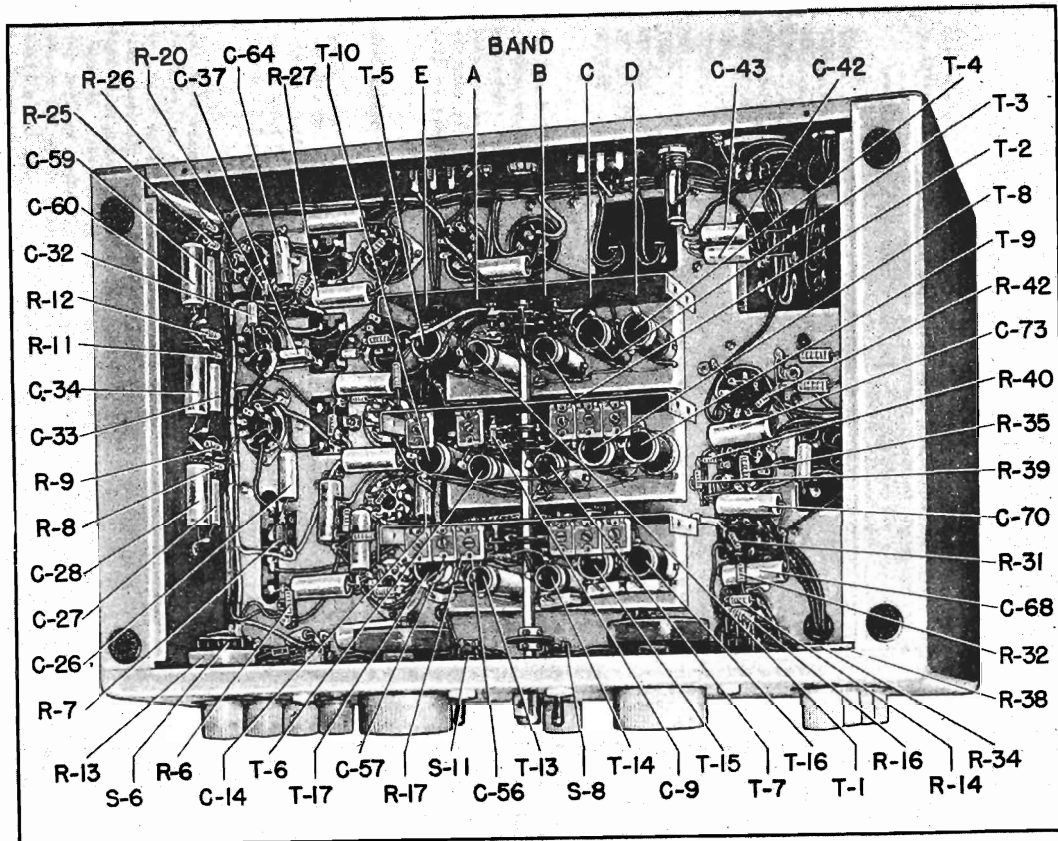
Bottom View of Receiver, Coil Compartment Side Plates Removed.
